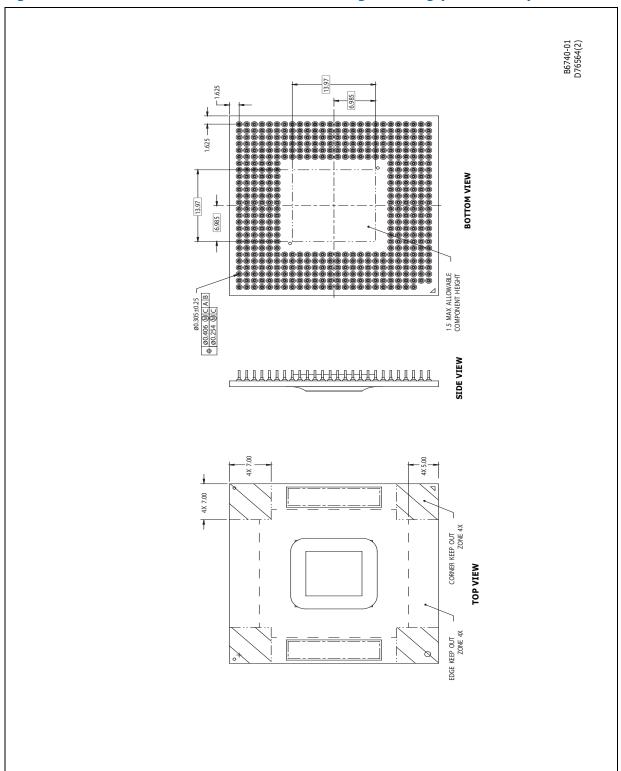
3-MB Die Micro-FCBGA Processor Package Drawing (Sheet 1 of 2)
